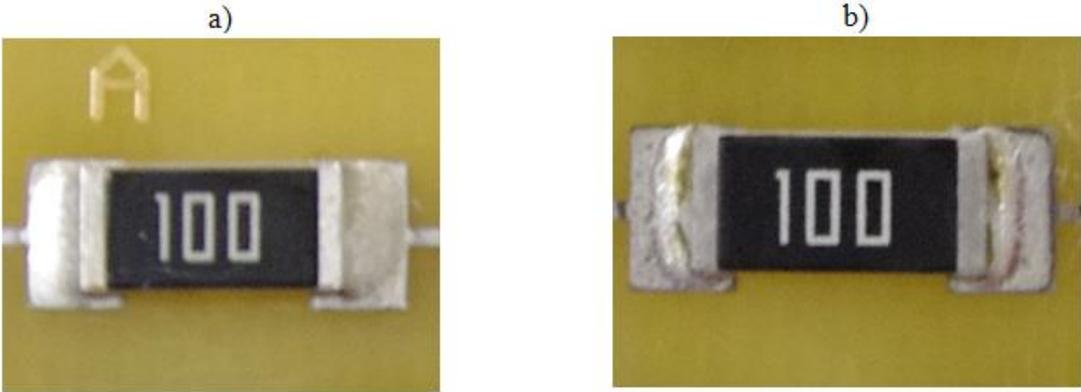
Solder joints soldered by different methods – a) Solder joints with solder preforms in the flux b) Solder joints with solder paste printed through the stencil
